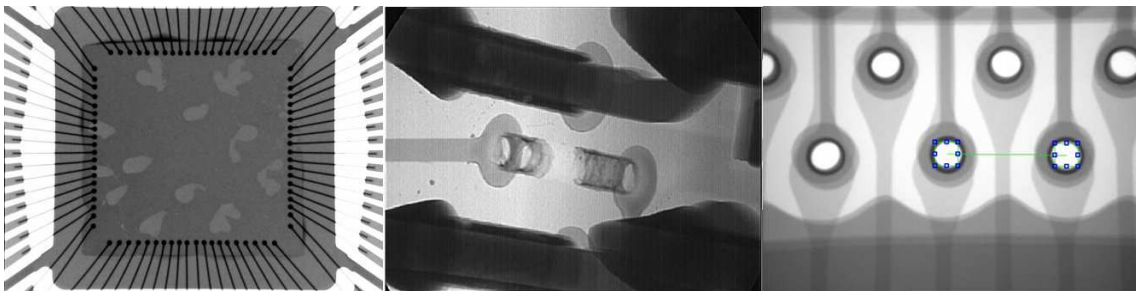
X-RAY INSPECTION OF ELECTRONIC COMPONENTS AND PCB'S
